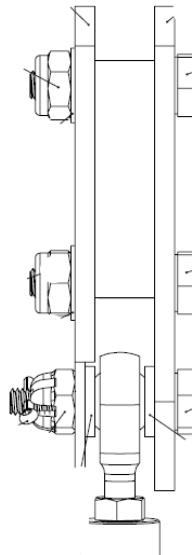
CESSNA BELLCRANK ATTACHMENT
